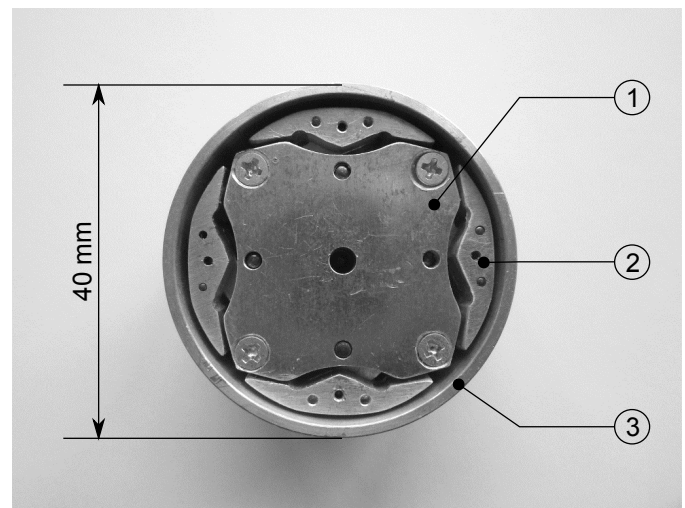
The overrunning clutch with opened housing. Marked: The torque transmitting components, drive shaft (1), four wedges (2), and output hub (3). To illustrate the dimensions of the clutch, the output hub diameter is signed.
